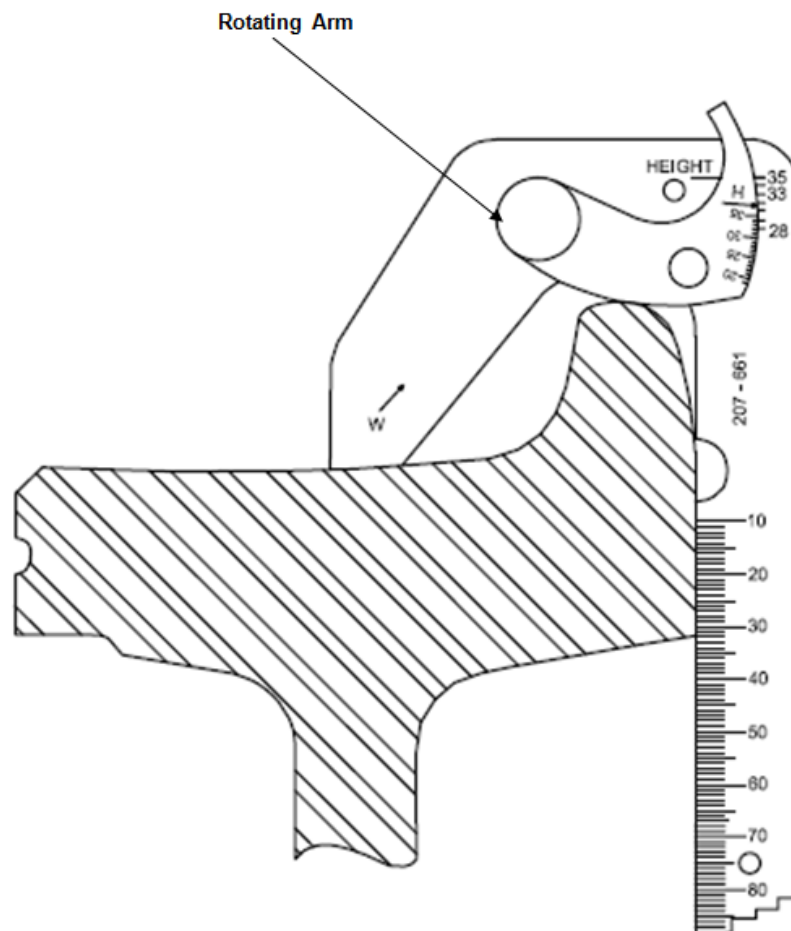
Gauge No.207-661 Flange height measurement
